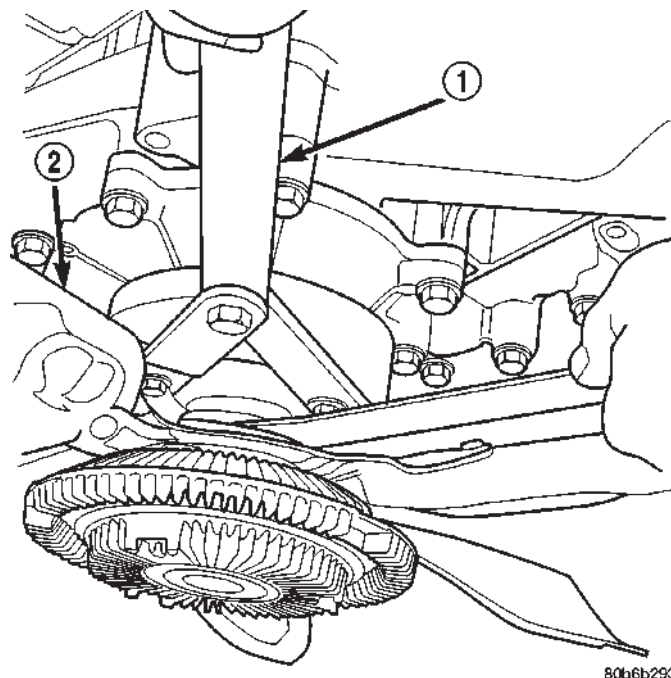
Using Special Tool 6958 Spanner Wrench and Adapter Pins 8346
